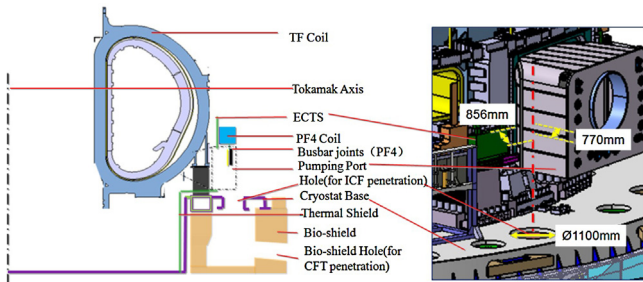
Assembly environment and interfaces of the PF4 in-pit feeder.
